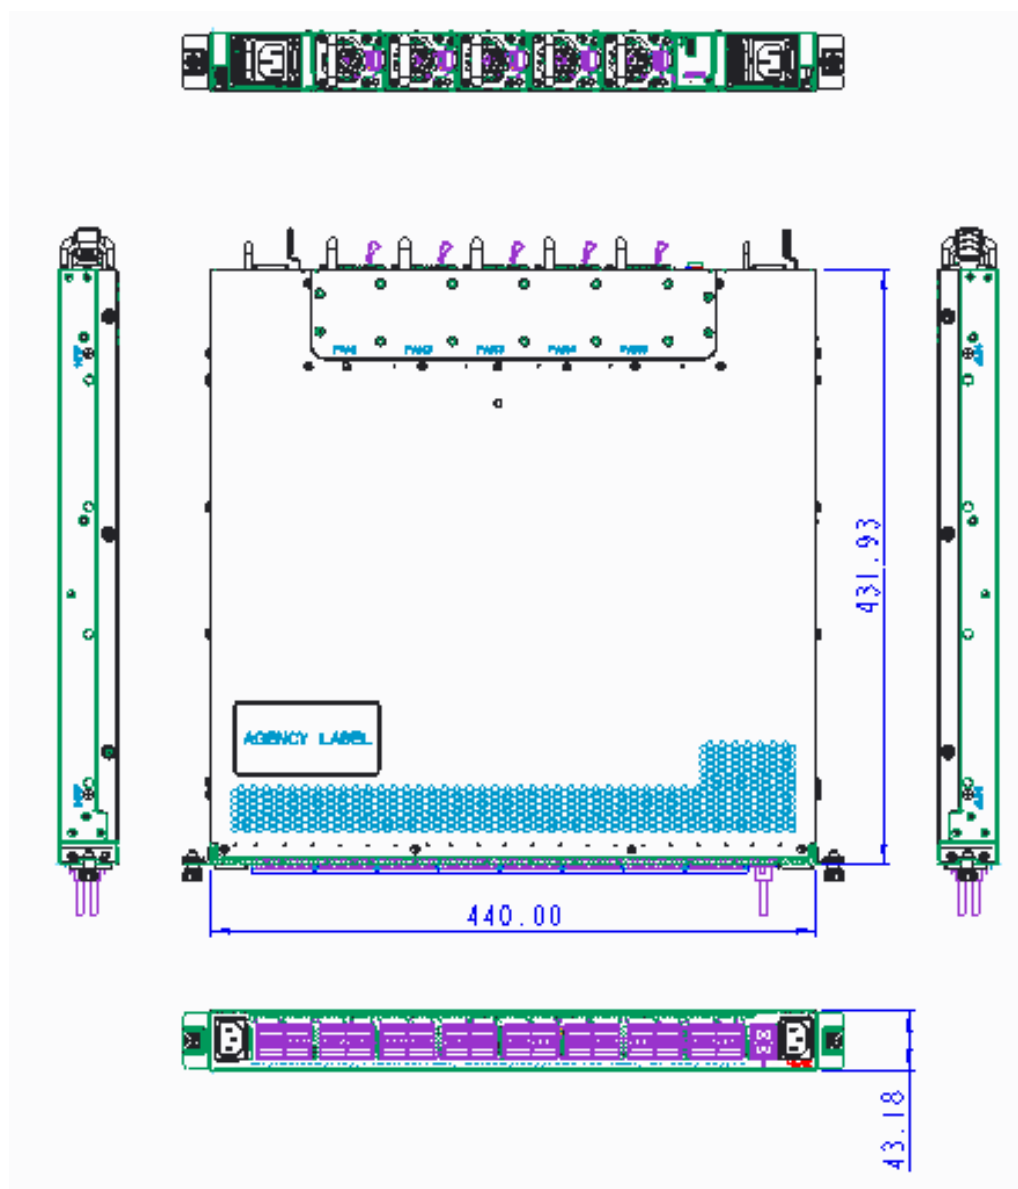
Inventec DCS7032Q28 Physical Dimensions
